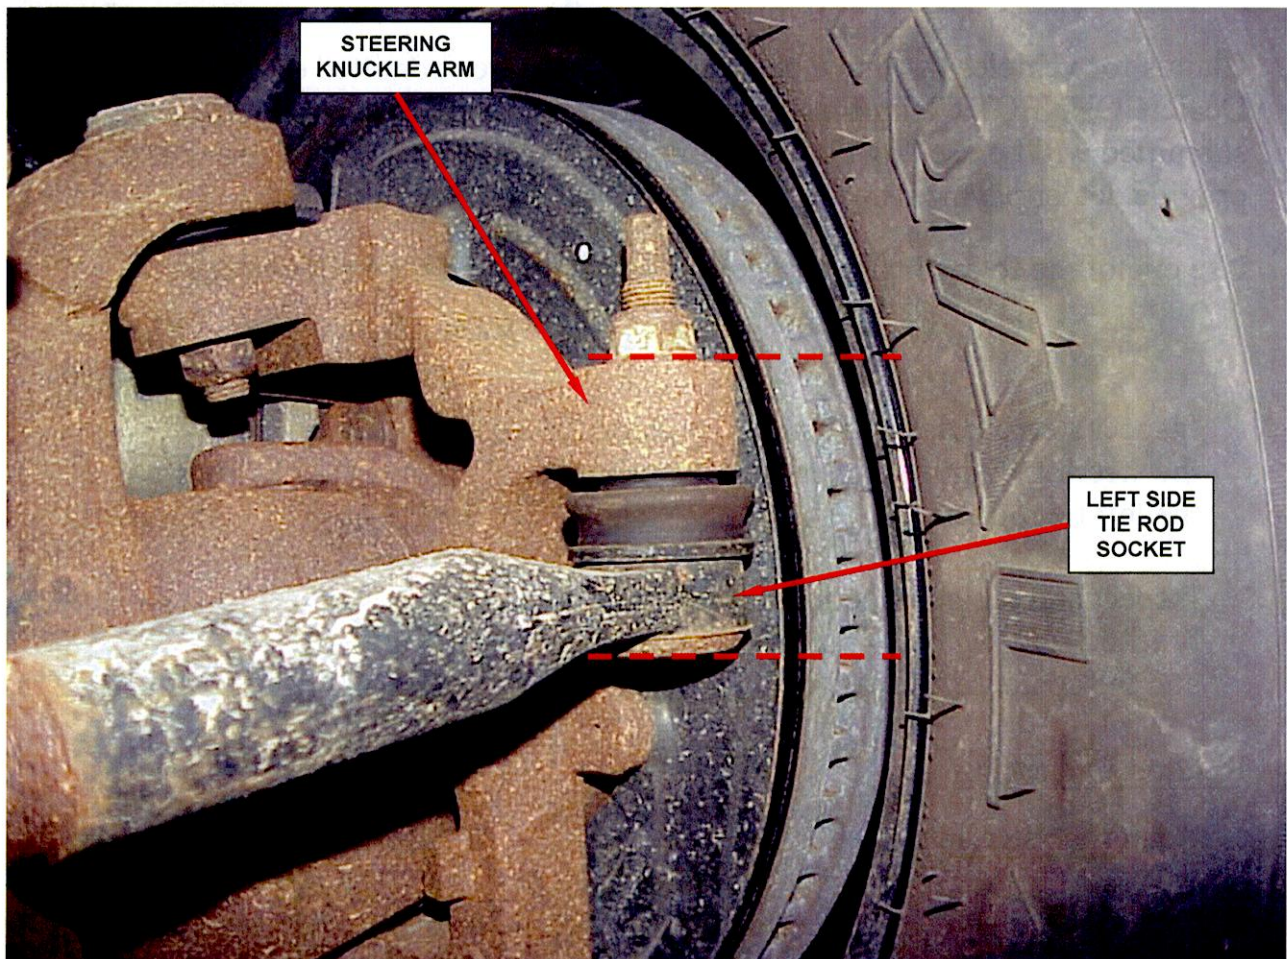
Align Left Tie Rod Socket Parallel to Left Steering Knuckle
